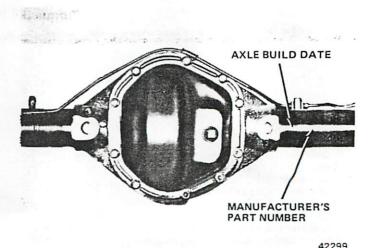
F-17 Axle Part Number and Build Date Code Location— Model 60 Axle
